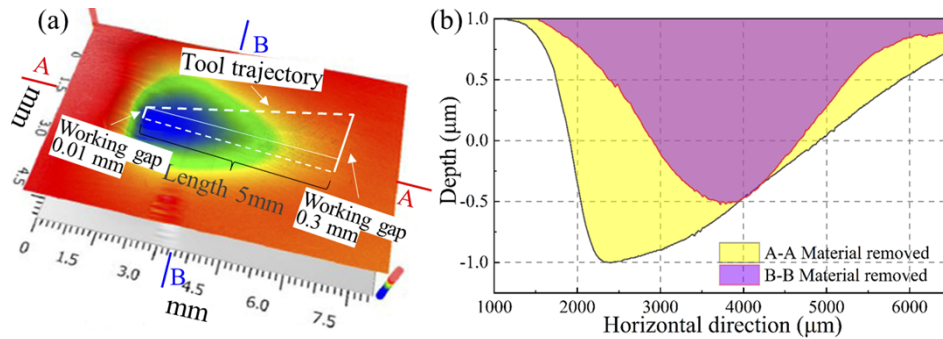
(a) Tool trajectory and 3D morphology and (b) cross-sectional profile with continuous gradient working gap using DC tool.
